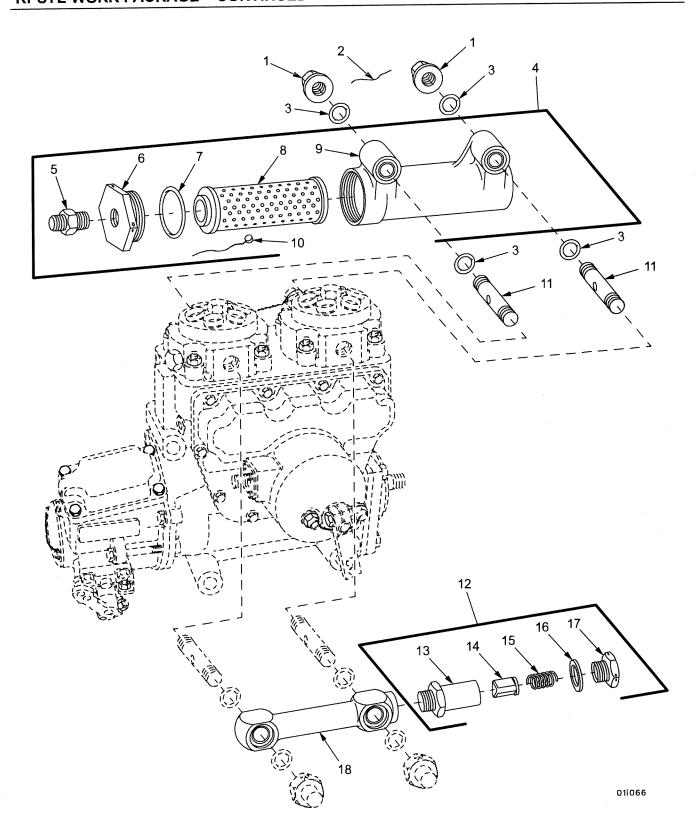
Filter Assembly, Bleeder Valve Assembly and Associated Parts.
